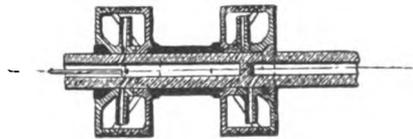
Piston and Rod Coupling, Duisburger.
